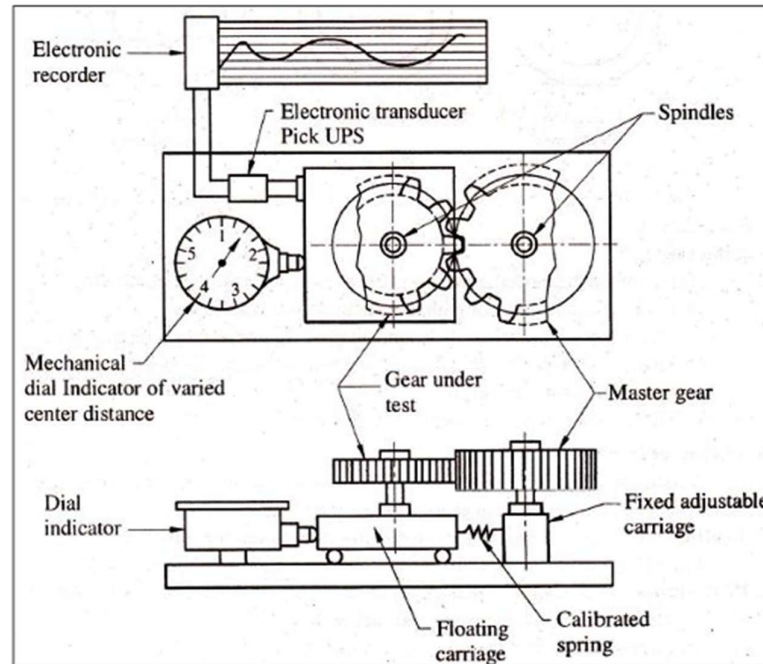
Parkinson's gear tester – Schematic diagram
